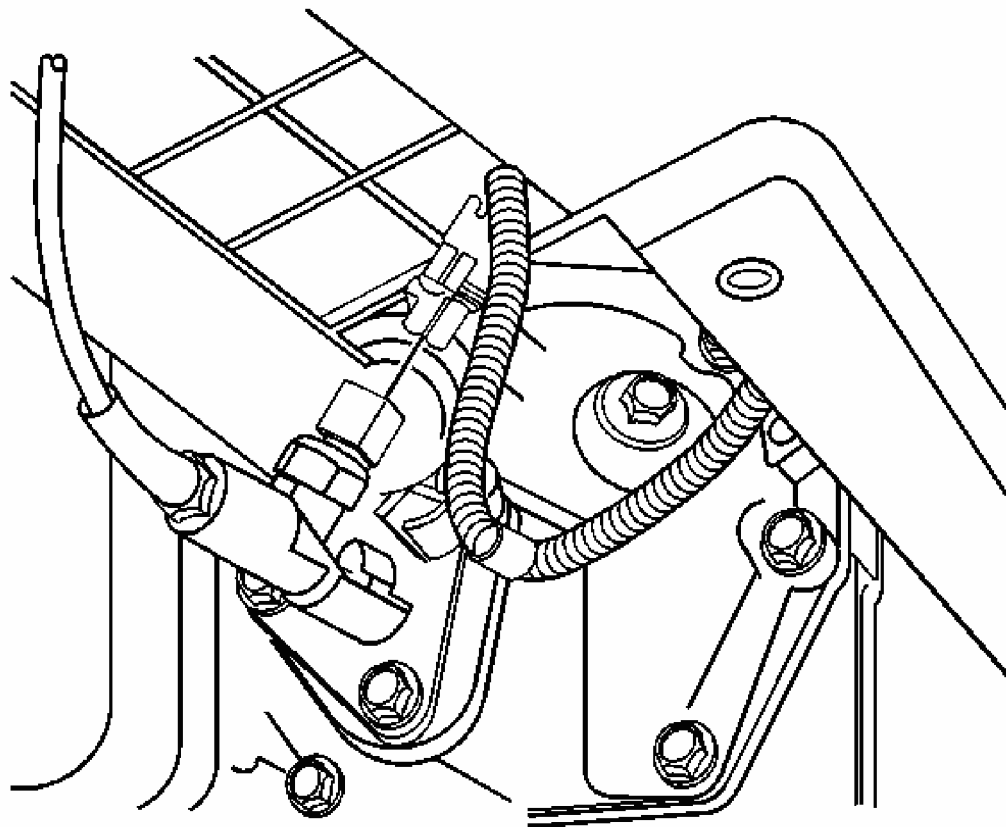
View Of Four-Wheel Drive Indicator Switch Electrical Harness
